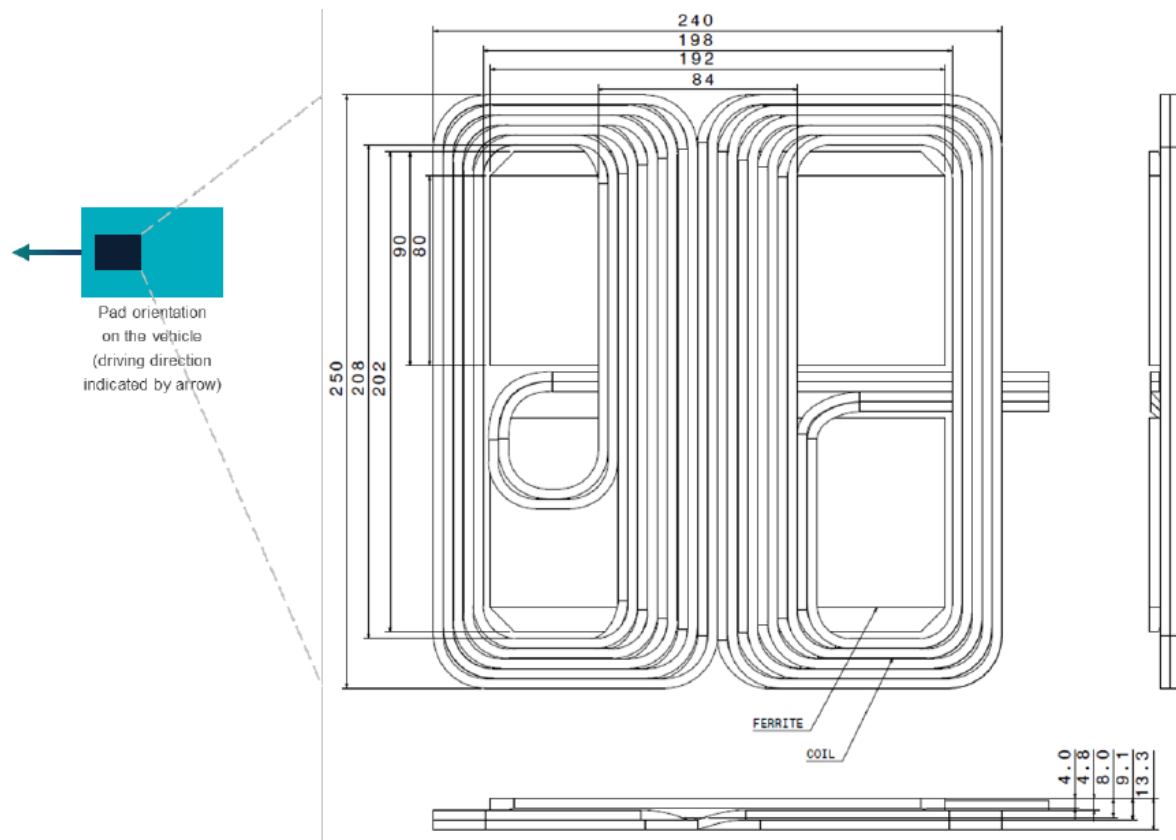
Mechanical dimensions of the VA-WPT2/Z1
